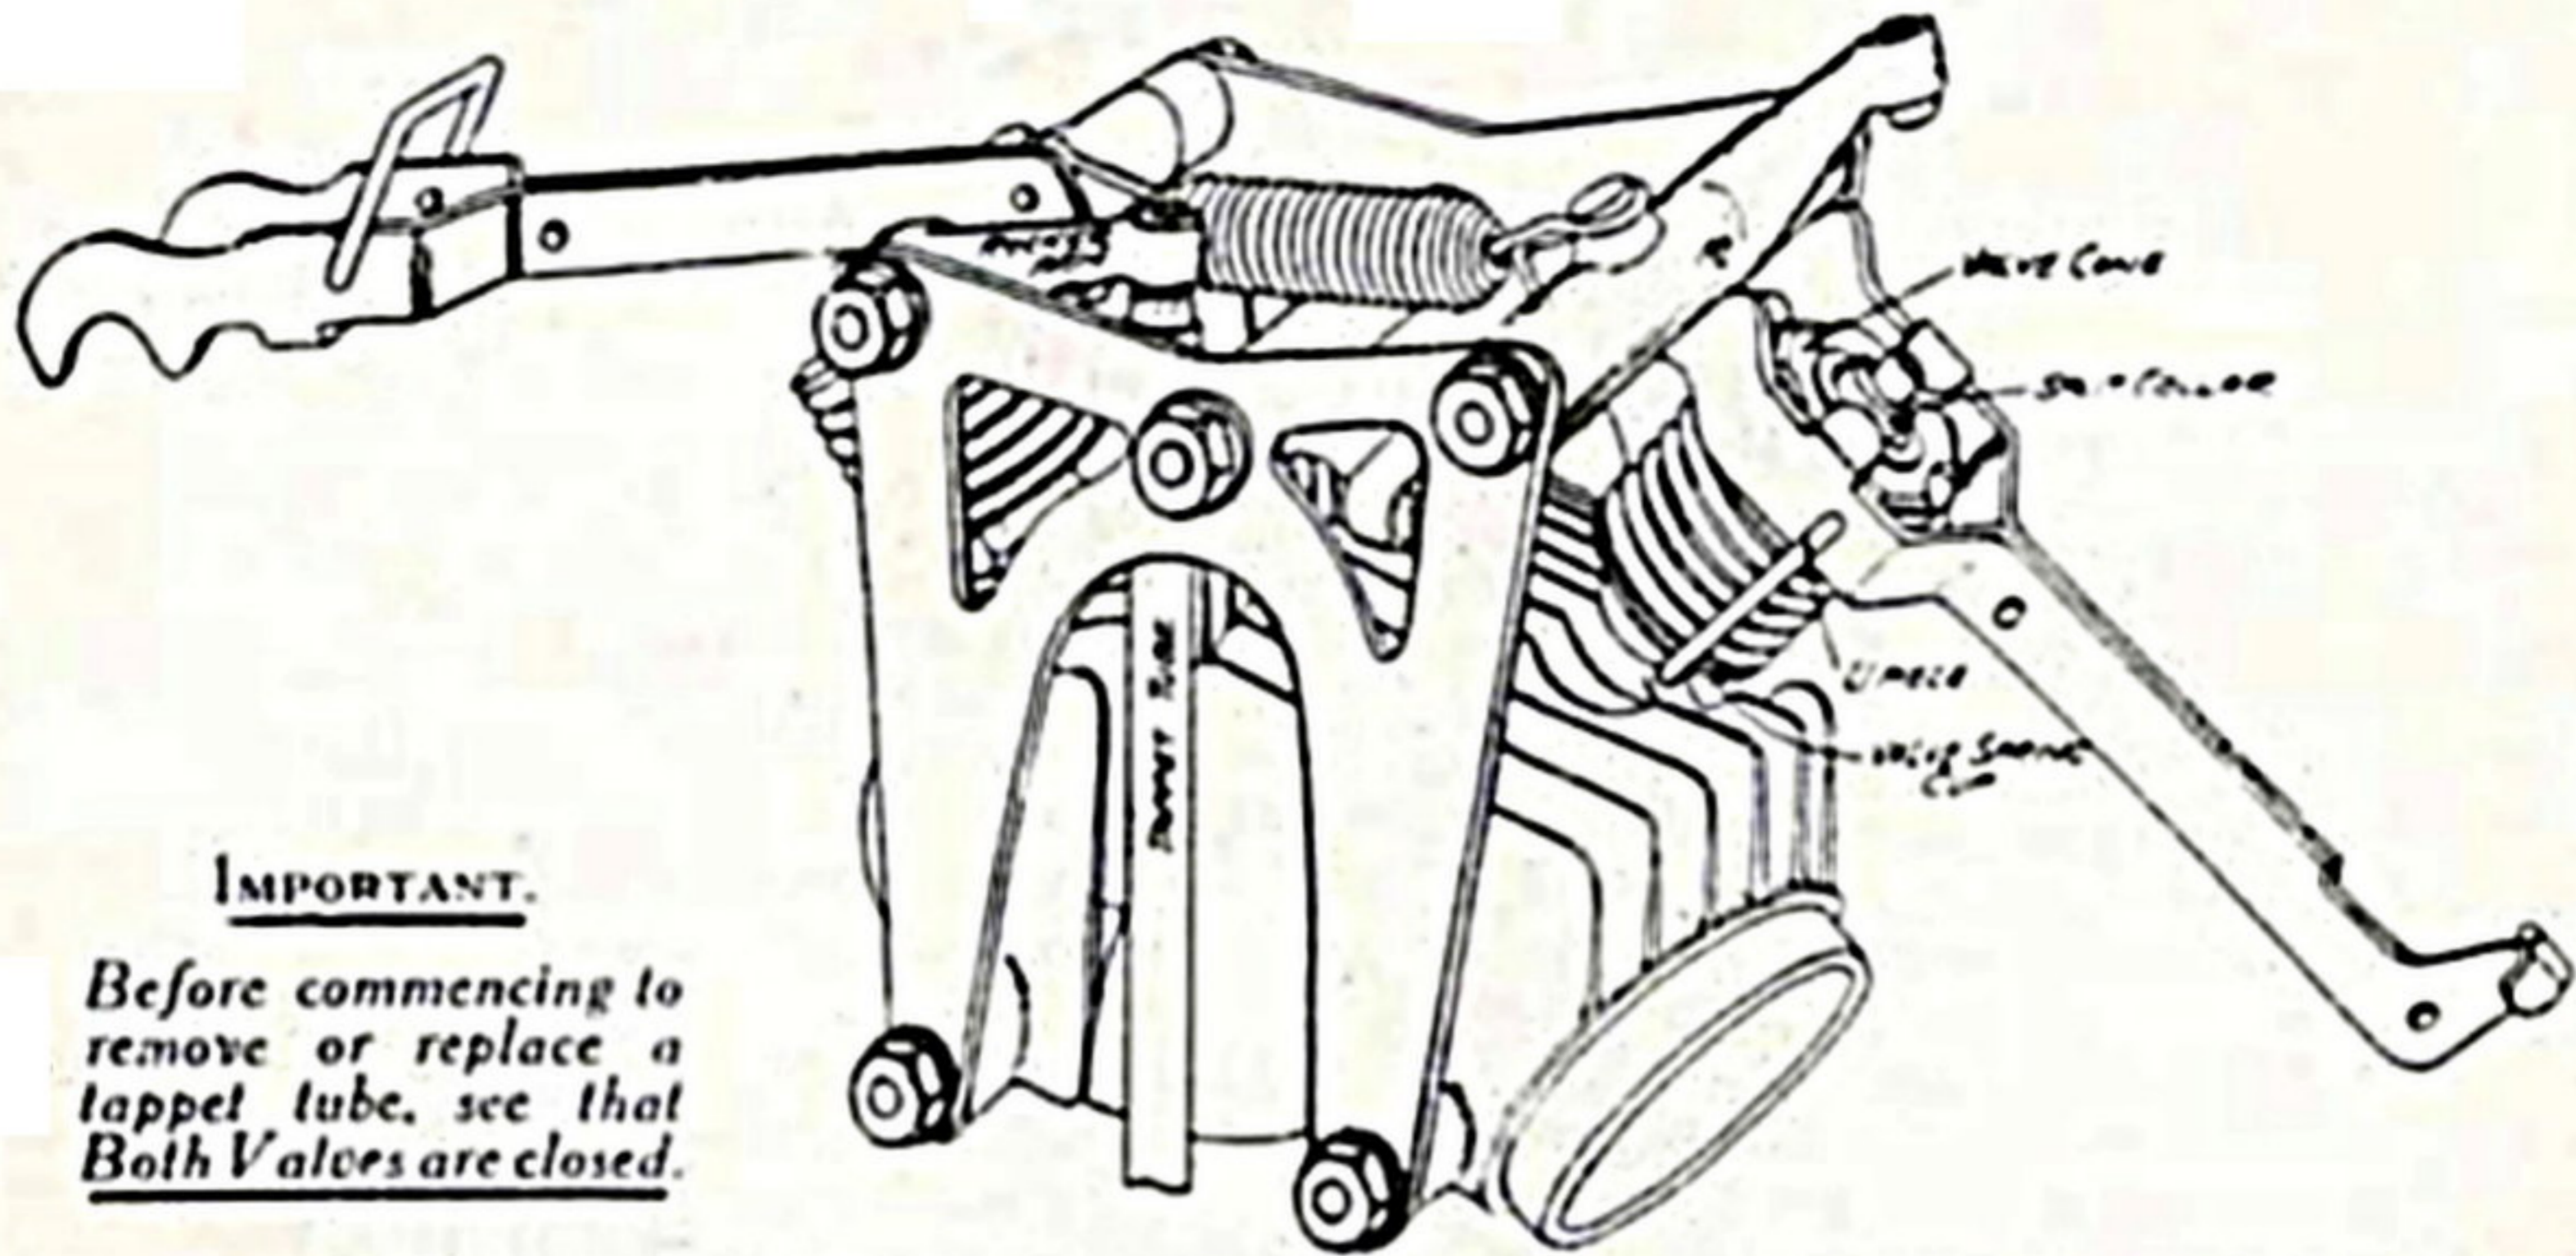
THE A.J.S. VALVE GRINDING TOOL
